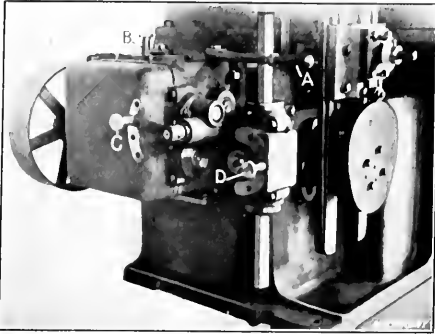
Close View of Gear-box on Rowbottom Cam Miller
